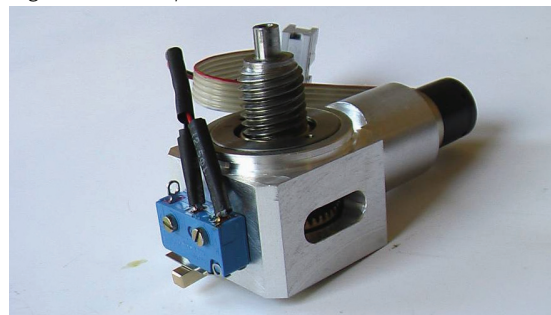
The complete TUKE mechanical unit with drive and end switch
